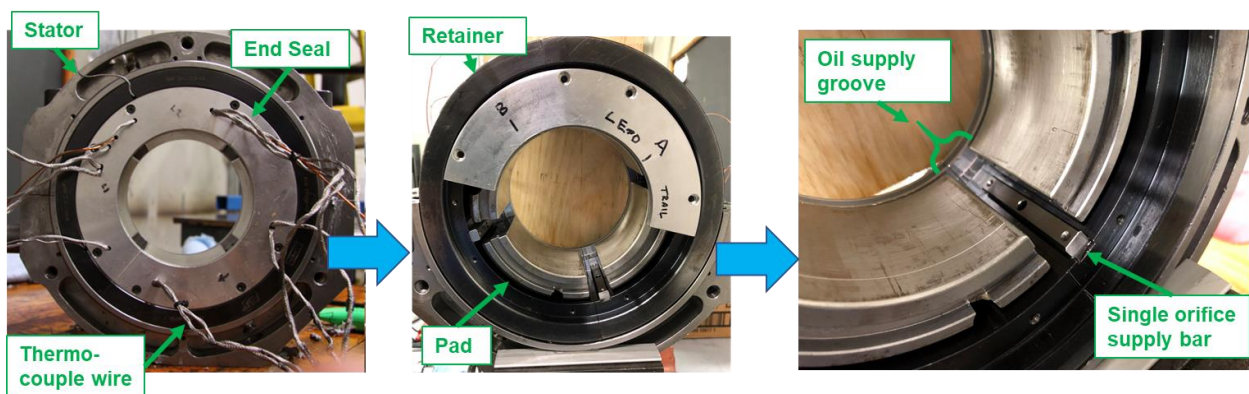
(a): Photographs showing (a) assembled flooded bearing, (b) flooded bearing with lower half-end seal removed to reveal pads and supply groove, and (c) close up view of groove with single orifice in supply bar. Wires denote thermocouples [9].
